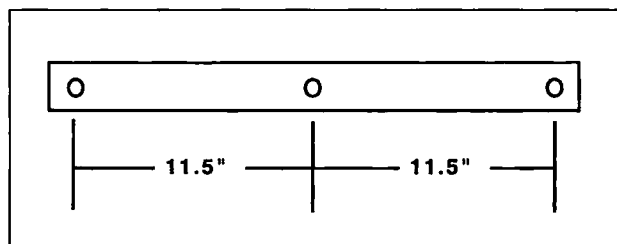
Tie rod—this is made from a thin piece of wood. The only dimension that is important is the one listed. Its purpose is to tie the elements together, and keep them in alignment, while folded and unfolded.
